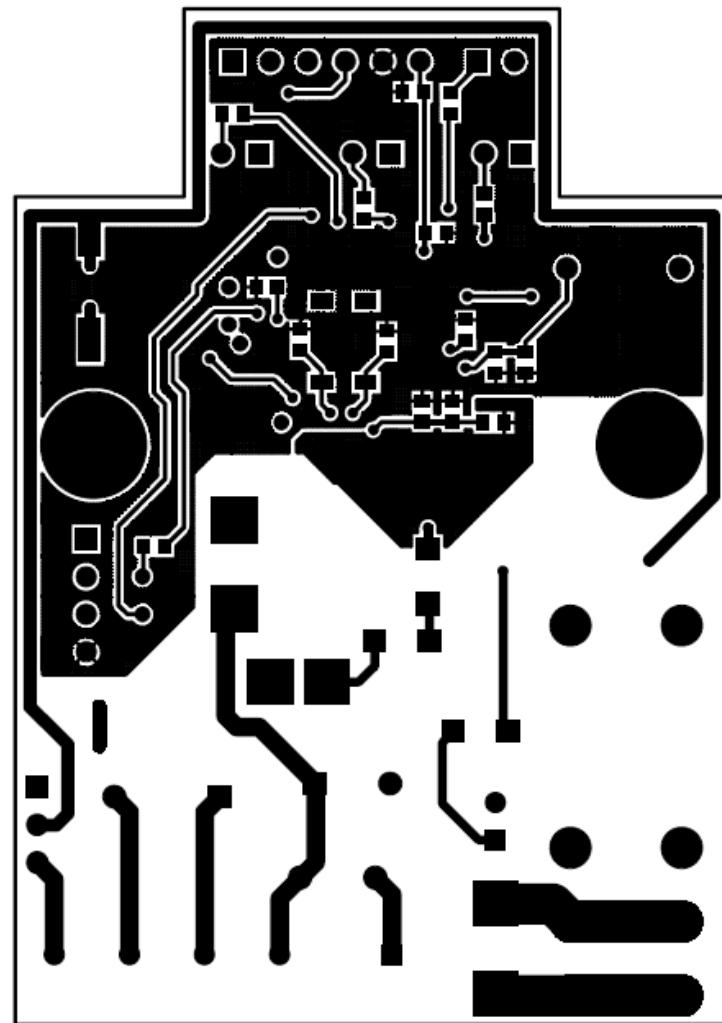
78M6612 Evaluation Board Copper Bottom View
